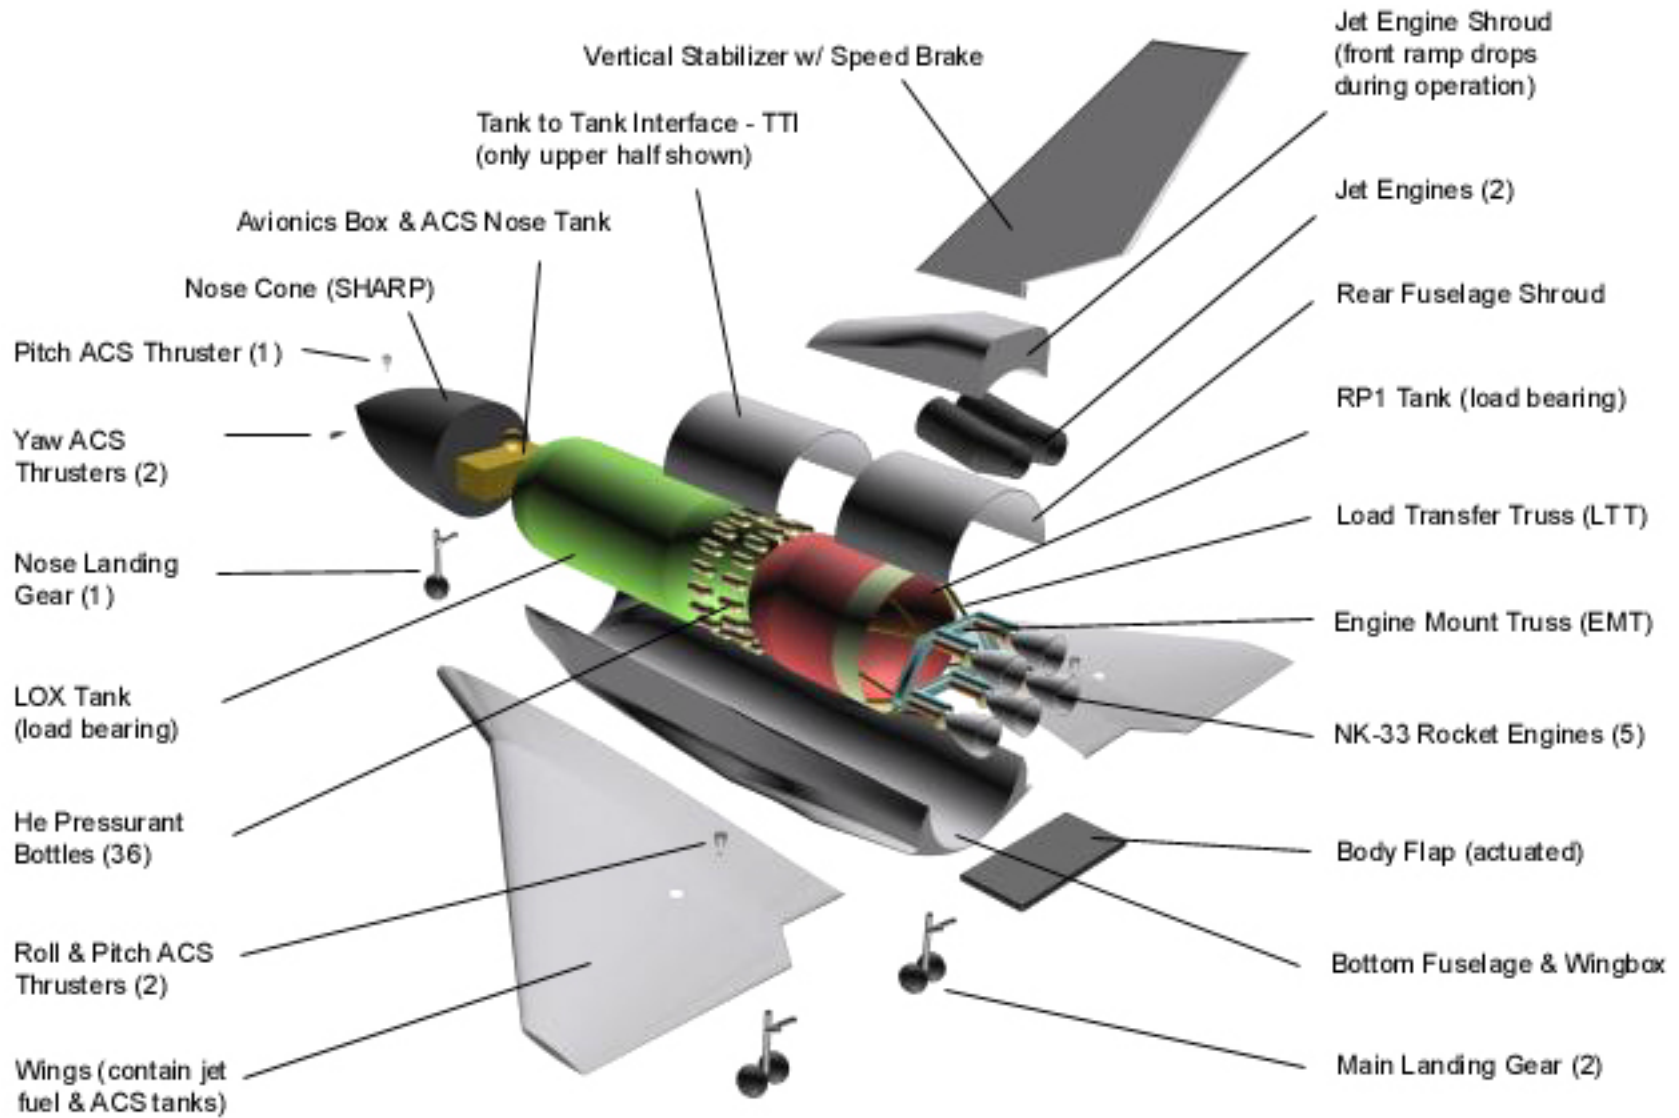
Exploded view of the K2X LAP indicating sub-component nomenclature.
